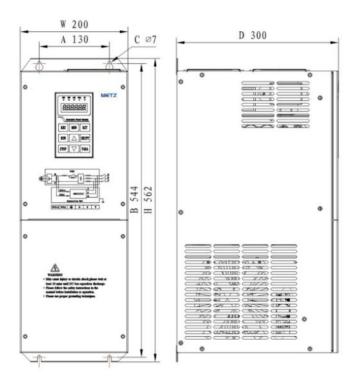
C3 wall-mounted chassis dimensions and installation dimensions
